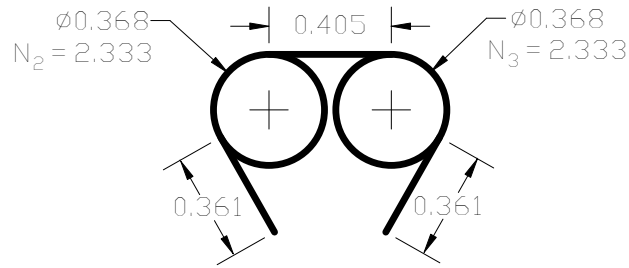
Dimensions (in cm) of the small coil mechanism.
